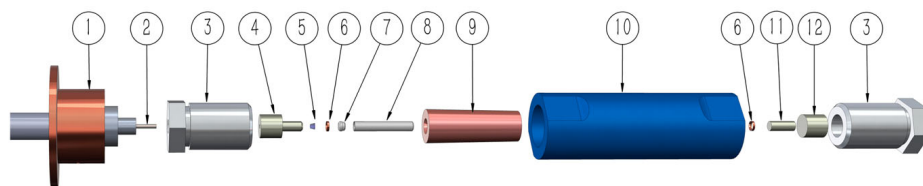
Schematic view and full assembly of a clamp cell. (1) Cryostat sample stick; (2) Optical fiber; (3) Locking nut (Al-alloy); (4,11) Pistons (WC). The left piston has a hole for an optical fiber and (5) a diamond anvil; (6) Anti-extrusion rings (Cu); (7,8) Sample container (Teflon); (9) Inner sleeve (CuBe or NiCrAl alloy); (10) Main body (Al-alloy); (12) Support spacers (WC). Extract from Podlesnyak et al. [60].
